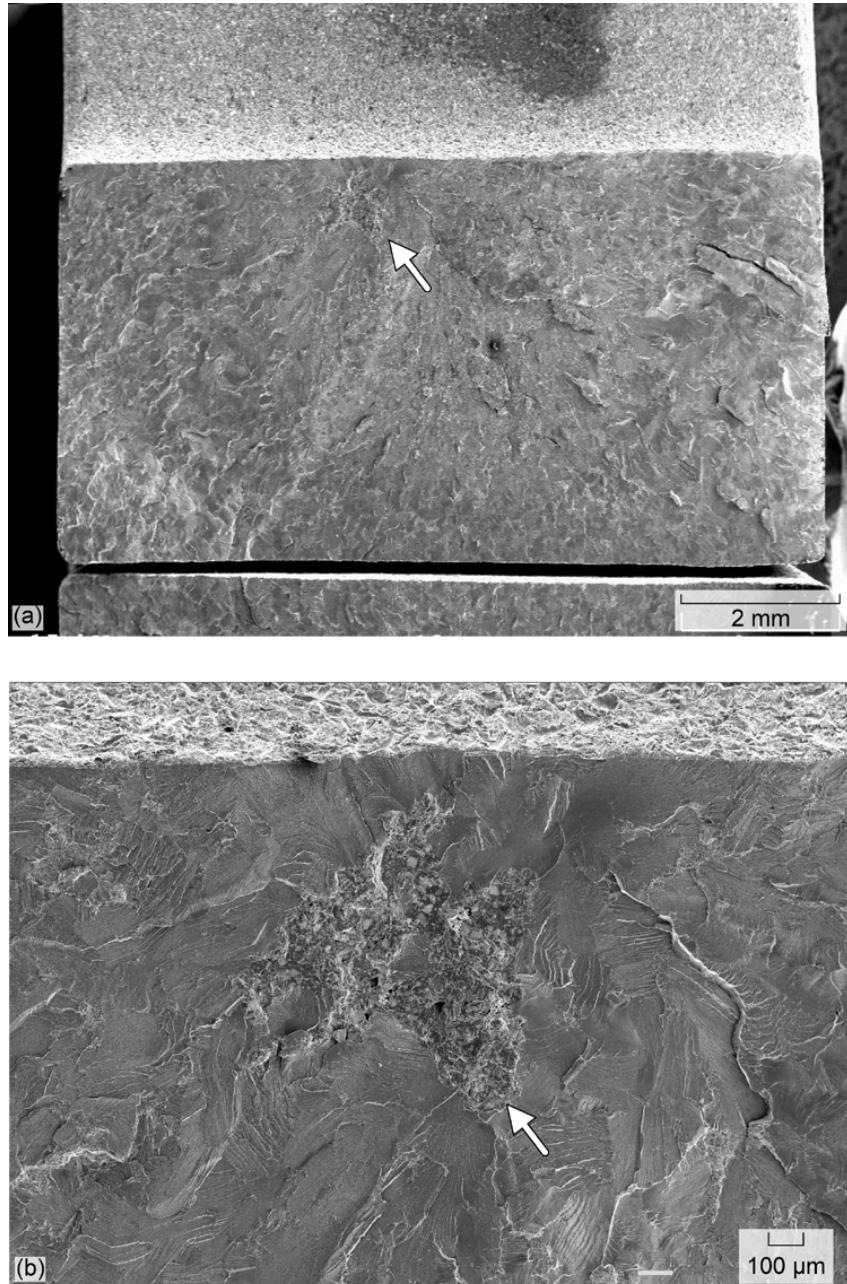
Partially solution-treated Charpy specimen fracture surface at (a) low and (b) higher magnification with arrows indicating fracture origin.
